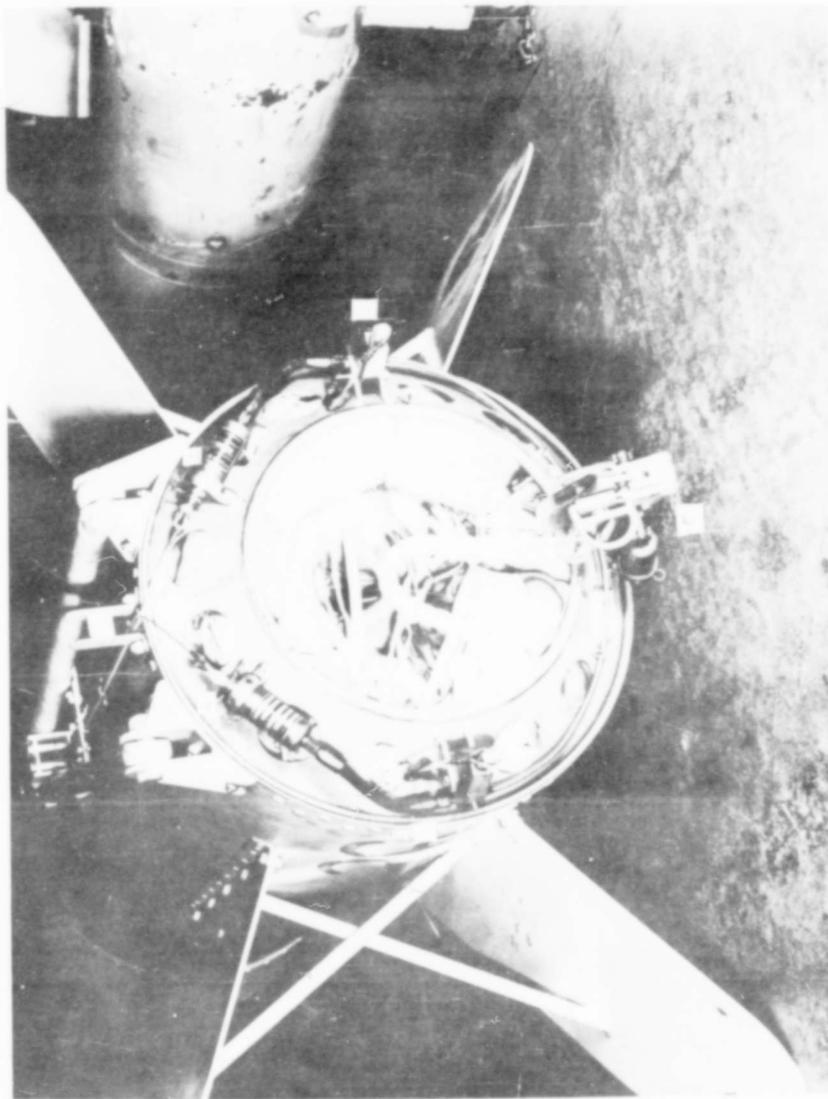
End View of Dispenser Body (with Tail Fairing Removed), Showing (A) M3 Initiator, (B) Explosive Tail Decouplers, and (C) M27 Initiator and Parachute Release Mechanism
